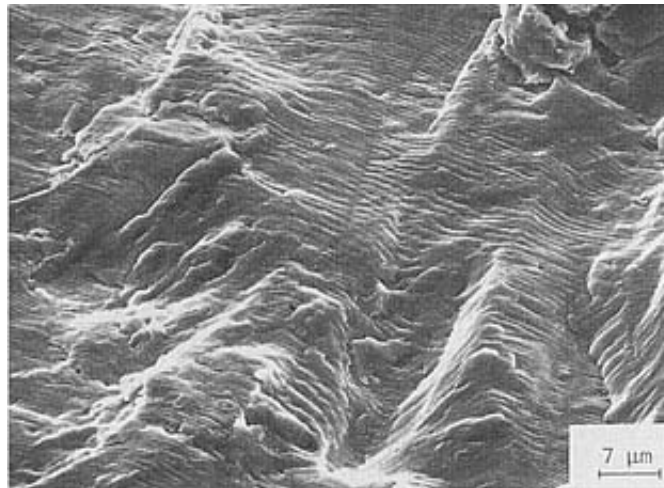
Fracture surface of a reverse bending fatigue failure
